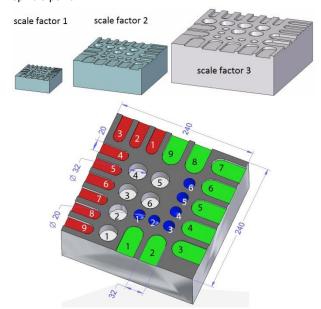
Test pieces including face milling, slotting and drilling with progressive cutting parameters, inspired by standard [6]; a) scale factors 1 (edge 120 mm), 2, 3; b) geometric details for scale factor 2.
